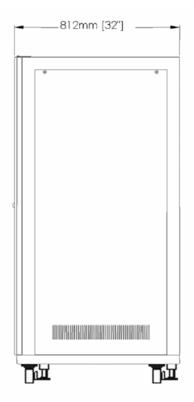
SA and SB Cabinet Mechanical Drawing
